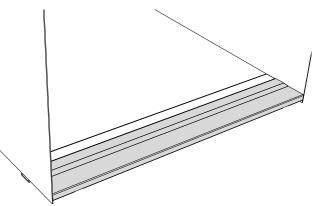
Align and securely weld the floor extension to the previously installed steel section.
